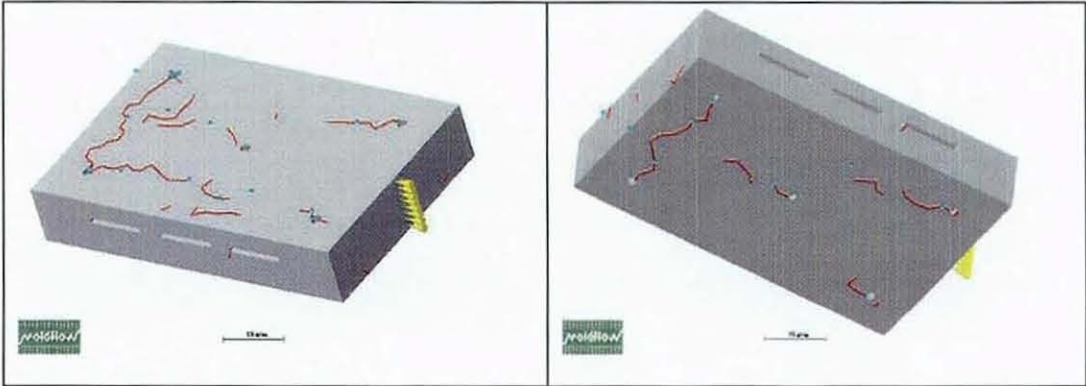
Weld lines and air traps at the end of injection cycle for equi-thickness rectangular moulding tool [courtesy of Schmidt, 1999]
